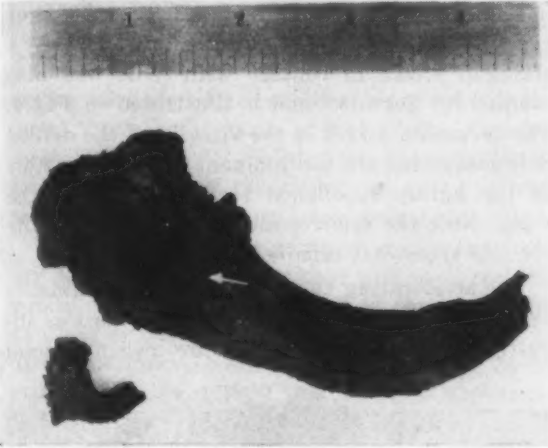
Ship boiler support, 25 Cr—20 Ni alloy, corroded by products of combustion of vanadium-bearing fuel oil. Note similarity in appearance of oxide on support (arrow) and completely corroded 16 Cr—25 Ni—6 V laboratory specimen.
